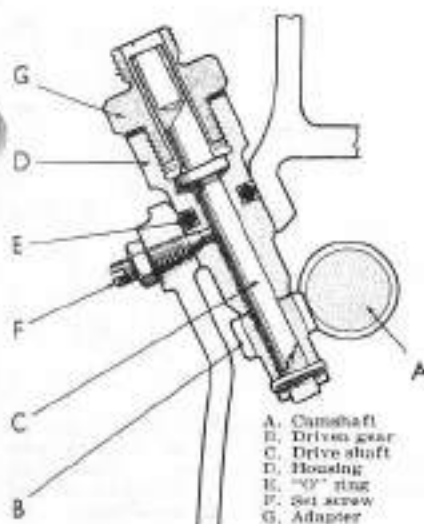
Cross-sectional view of hour-meter drive assembly for three cylinder engines. Set screw (F) must be removed and the assembly withdrawn from crankcase to permit camshaft removal.
